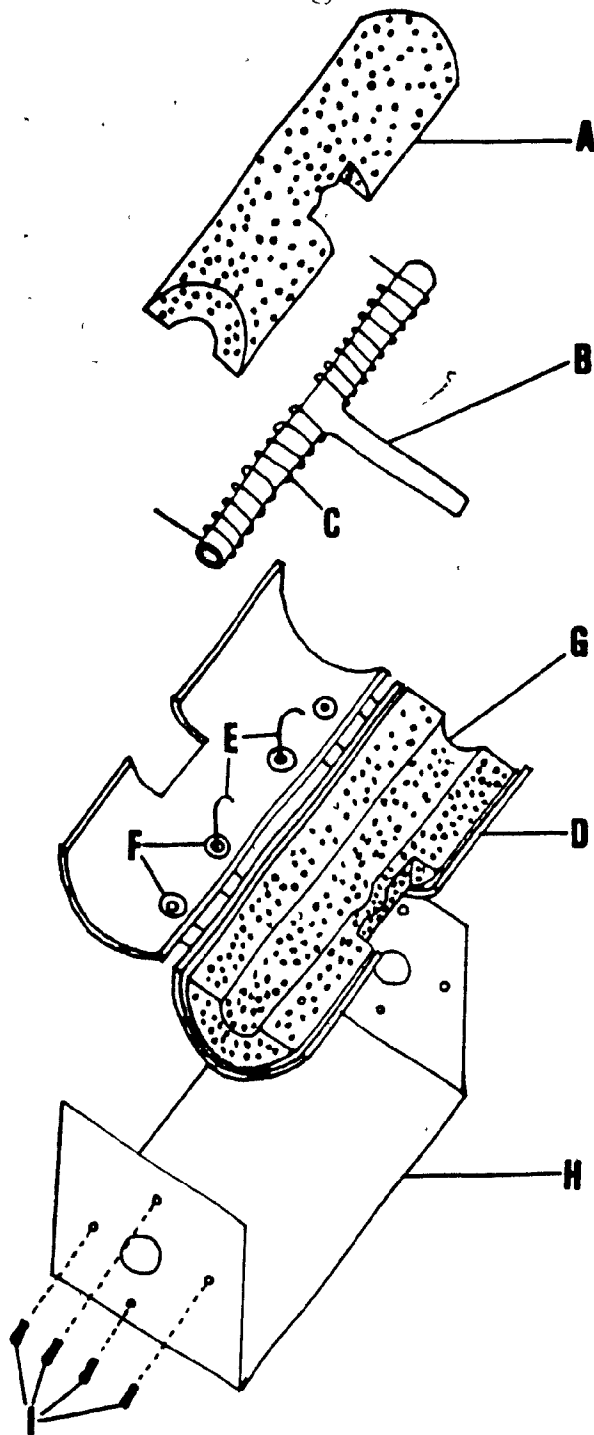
Exploded view of quartz T-tube furnace: A, shaped firebrick upper casing; B, quartz T-tube; C, Alloy 875 resistance heating wire; D, hinged aluminum casing; E, type K thermocouples; F, Swagelok connectors with ceramic tubing inserts; G, shaped firebrick, lower casing; H, aluminum mounting bracket; I, machine (6-32) screws.
